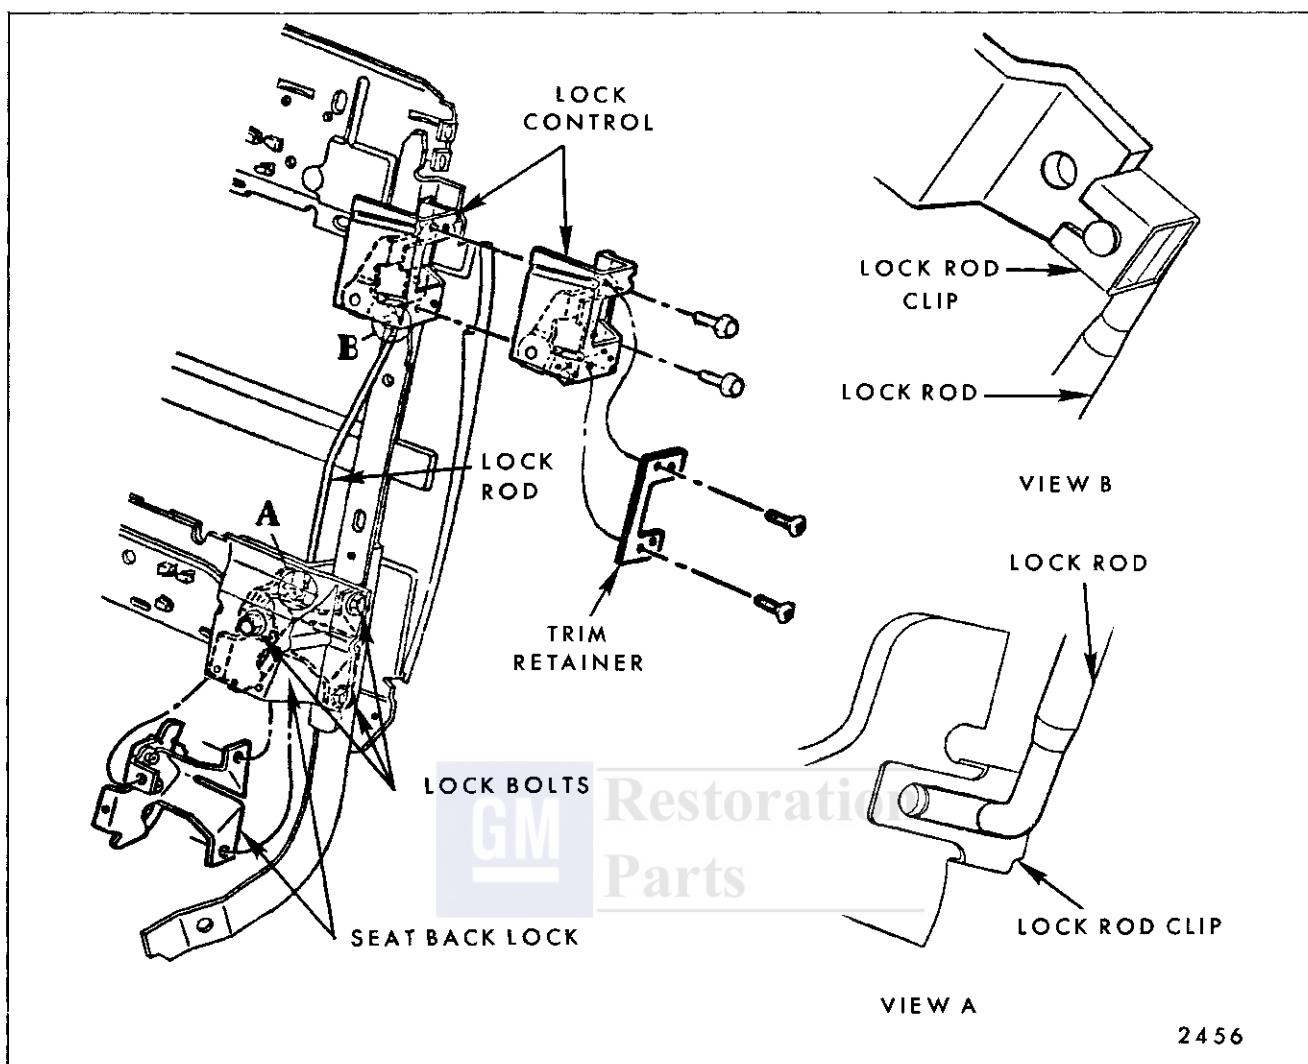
Front Seat Back Lock - "C & E" Body Two-Door Styles, Standard Full Width Seat
